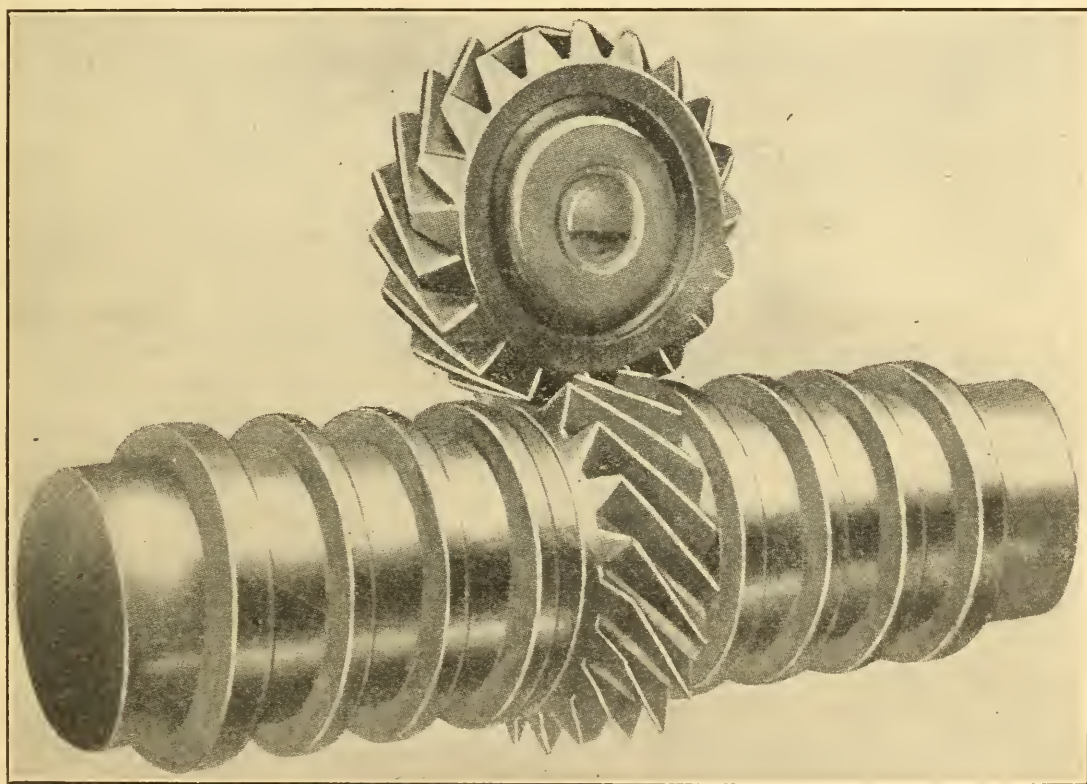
HINDLEY SPIRAL GEARS. RATIO 1 TO 1.
